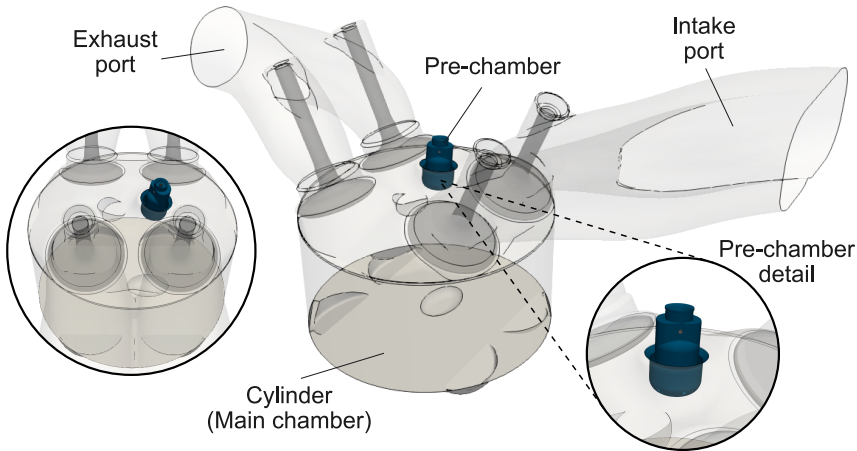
Schematic view of the pre-chamber assembly in the engine head.
